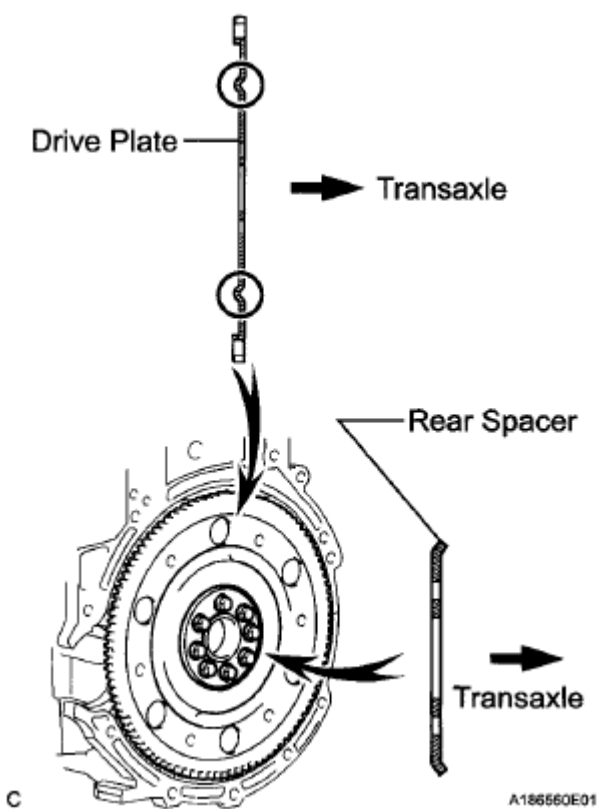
Installing Drive Plate And Rear Drive Plate Spacer
